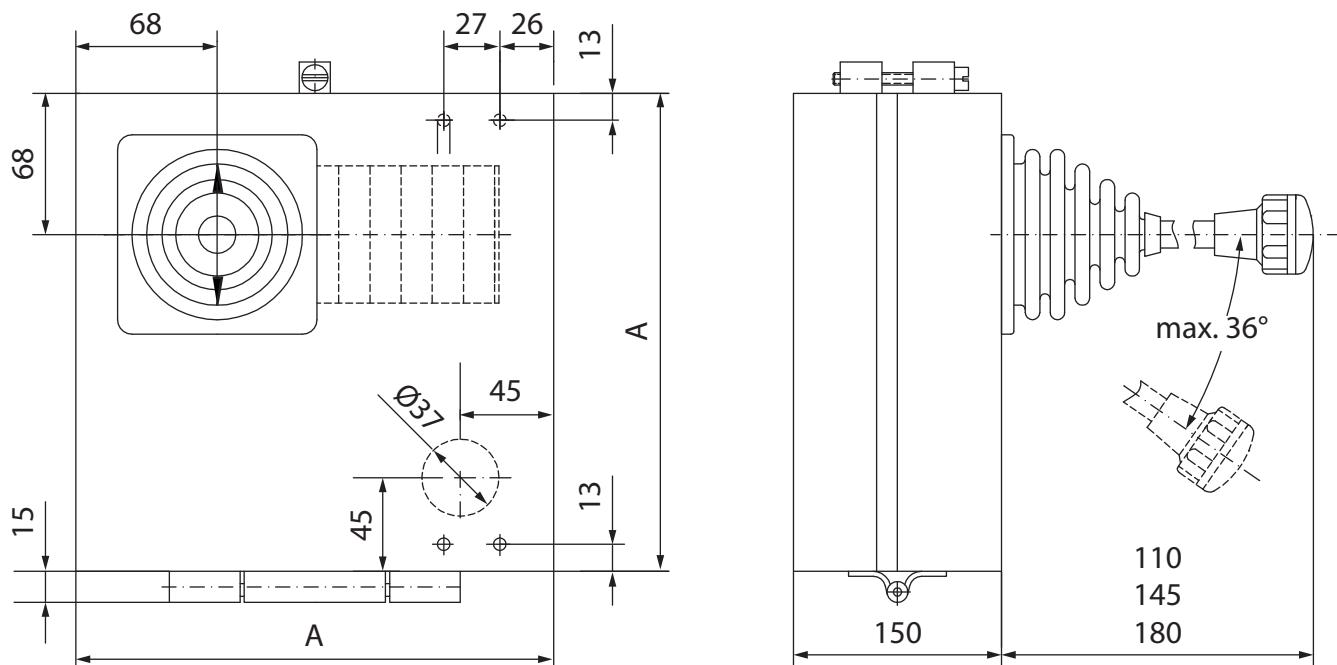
Joystick VNS0-QF-E (dimensions in mm)
